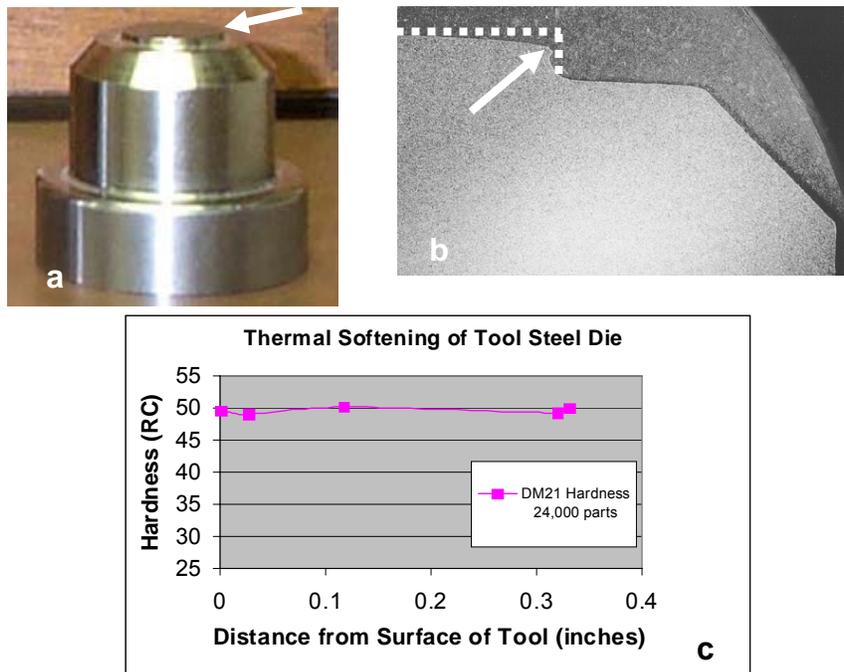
Machined SSDPC DM21 die (a) showing retention of shape (b) and hardness after 24,000 cycles (c).
